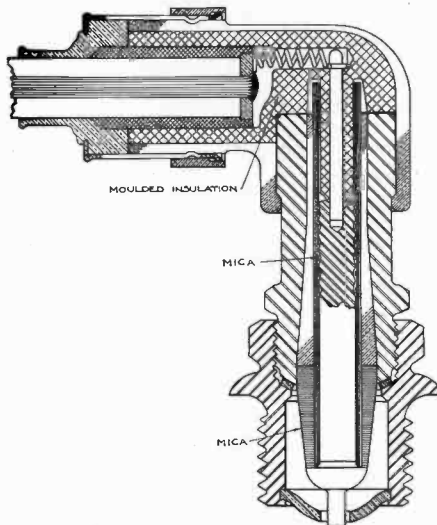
Diagram showing cross-section of elbow type shielded spark plug.
